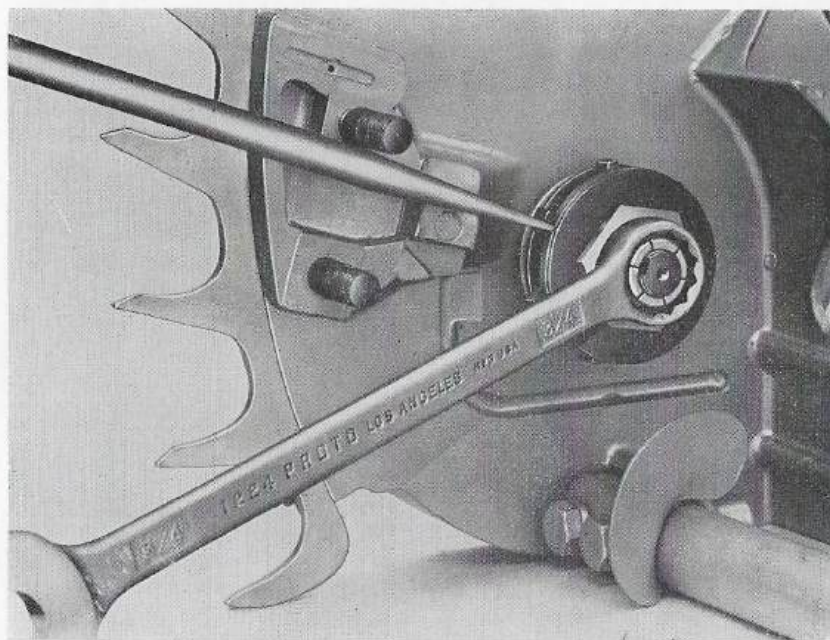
Blocking Chain Drive-Sprocket to Remove Locknut
